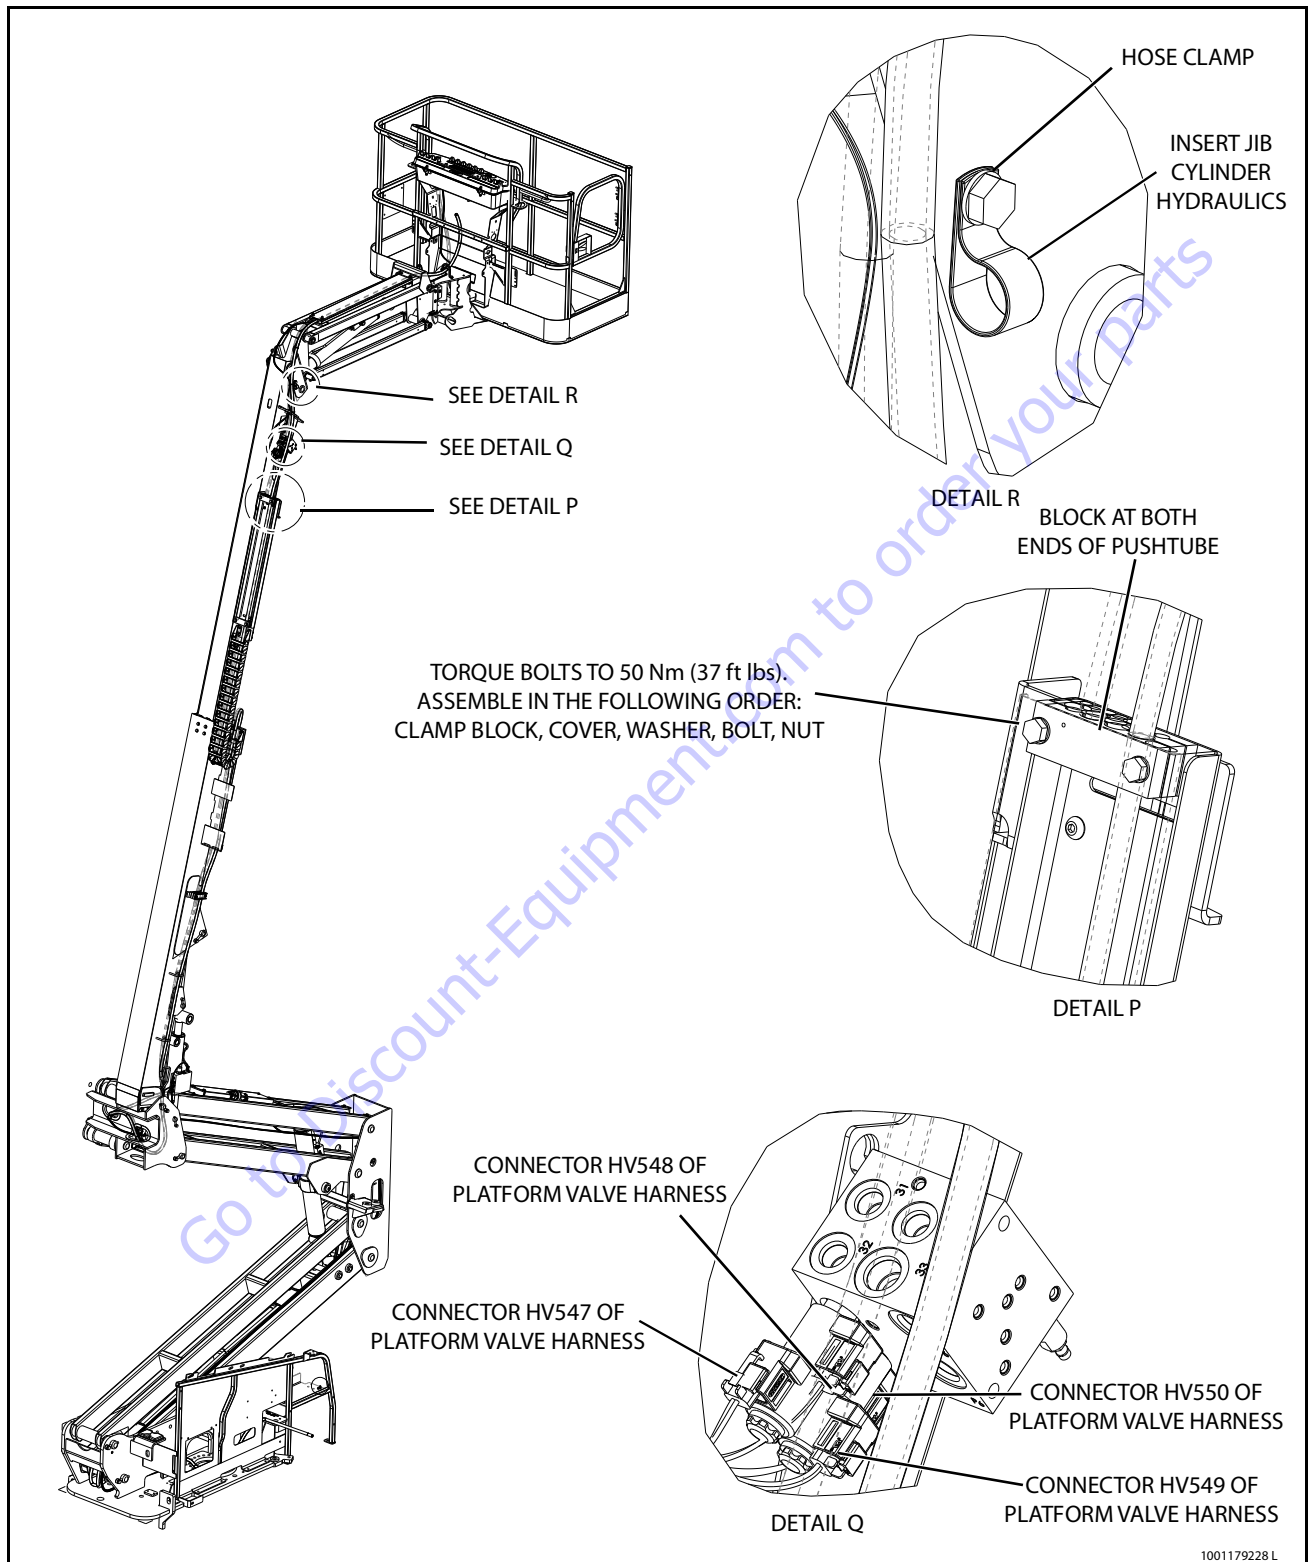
Cables and Clamps Installation - Sheet 6 of 8
